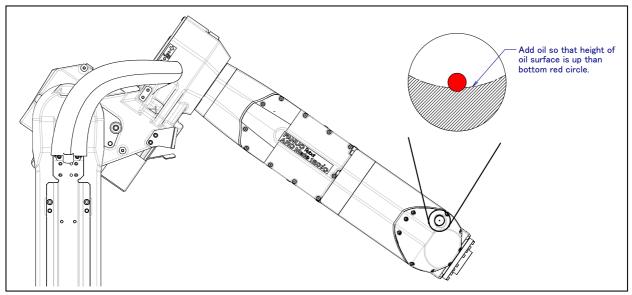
(g) Standard of oil sight glass (supply oil J5/J6-axis gearbox) (ARC Mate 120iC, M-20iA)
